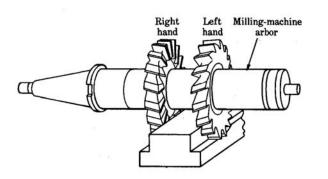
Mounting of cutting tools on milling arbours.
